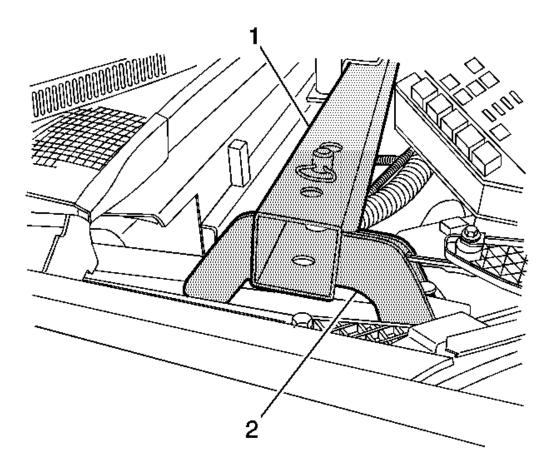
Identifying Special Tools - J 28467-3 & J 43405 Courtesy of GENERAL MOTORS CORP.
